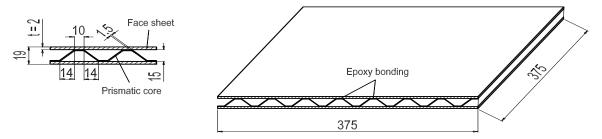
A corrugated-cored sandwich panel made from mild steel. (Dimensions are in mm)
